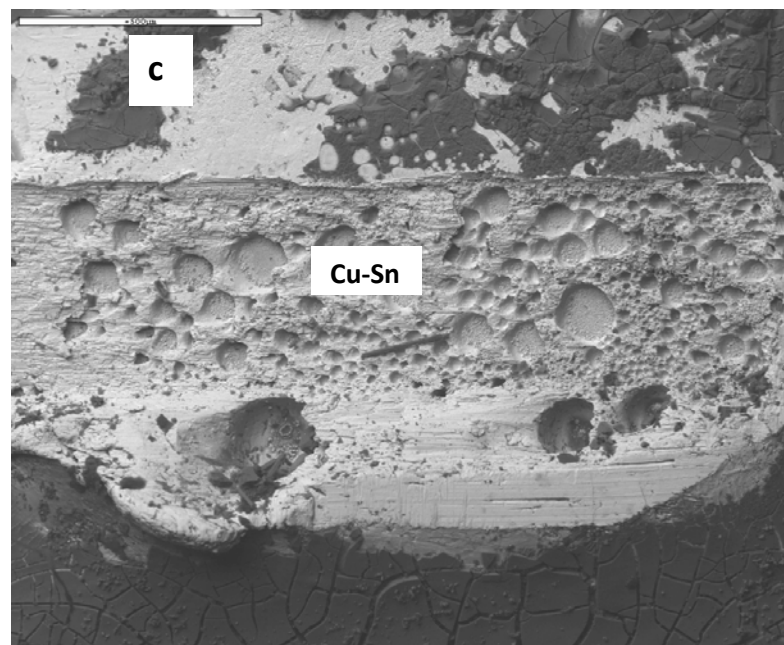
Fracture surface of the interface formed between Sn-3.8Ag-0.7Cu solder alloy and component at 300 hours of isothermal ageing.
